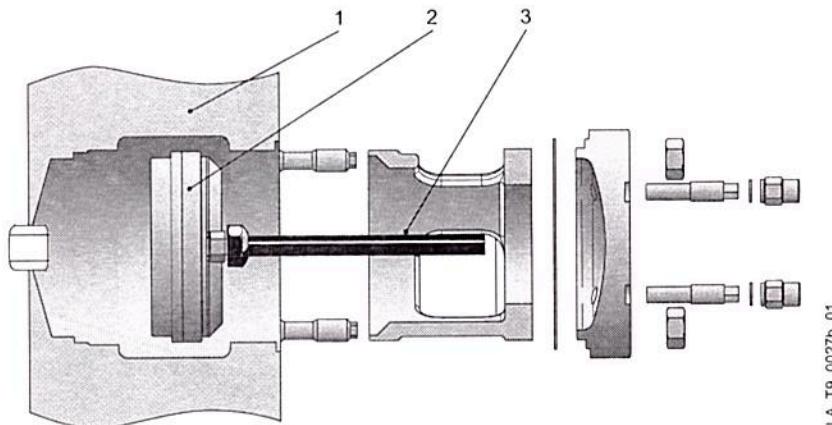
Valve dismantling and assembling device for lightweight valves with pressure screws
